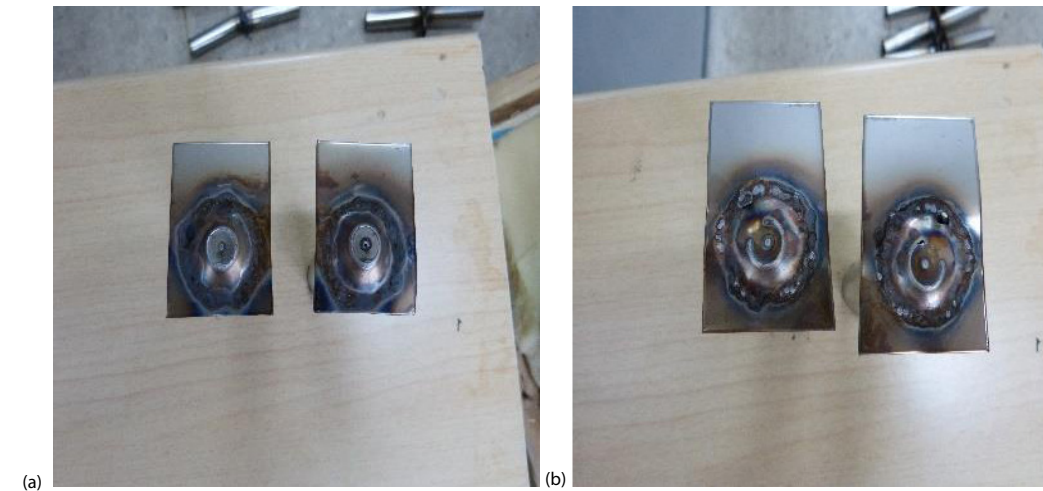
The geometric shape of weld; (a) Method A; b) Method B
